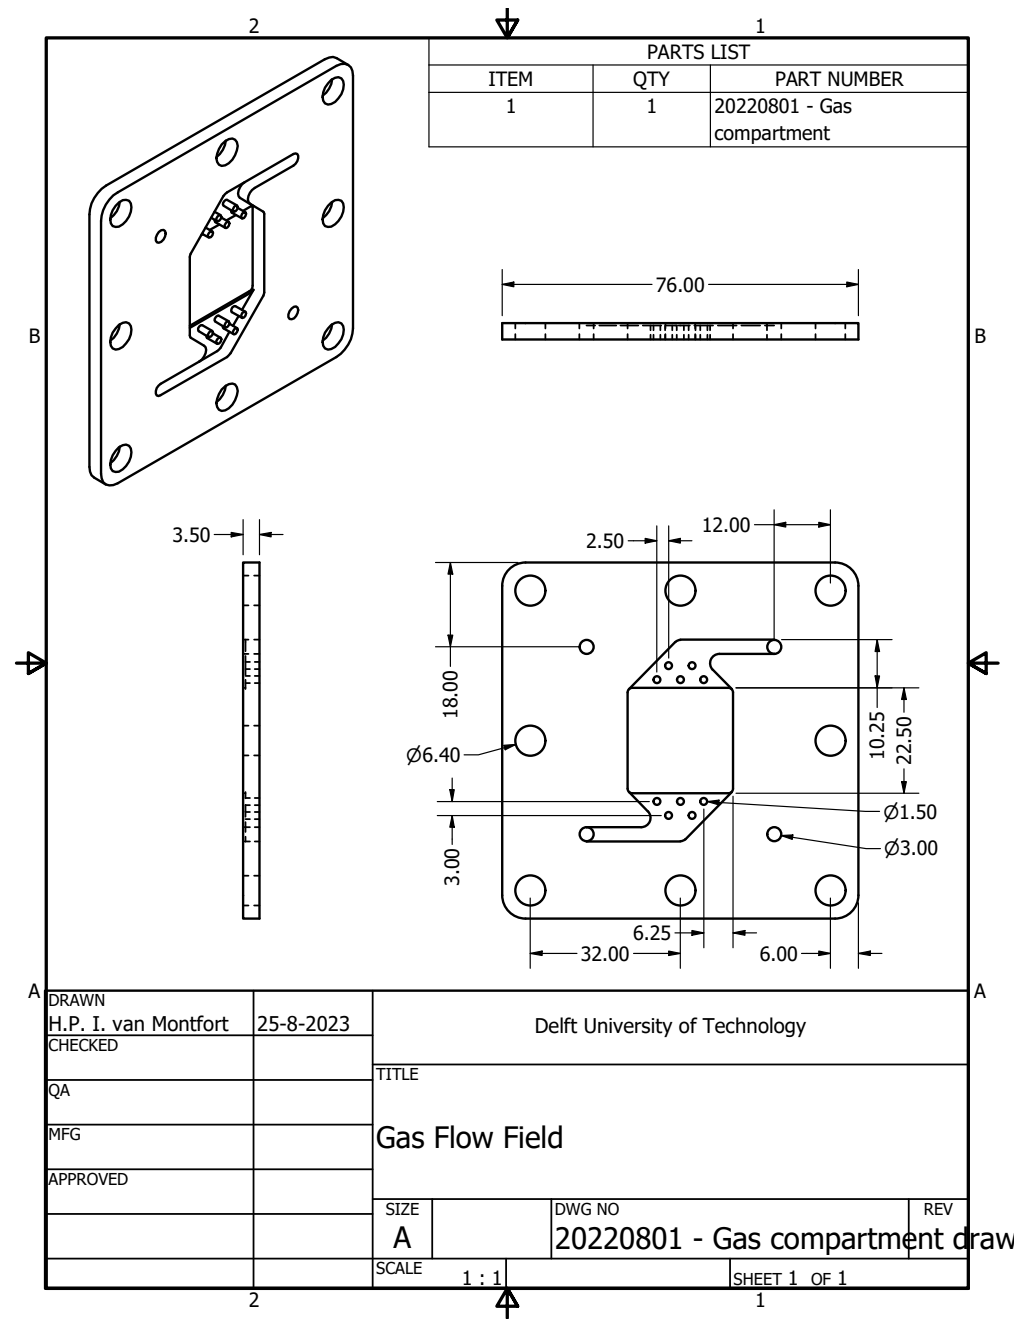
A.4: Technical drawing of the 3D-printable gas flow field.
